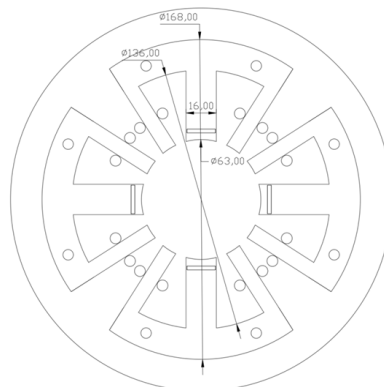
radial dimensions of the low-power novel twelve-pole E-type tooth hybrid magnetic bearing
